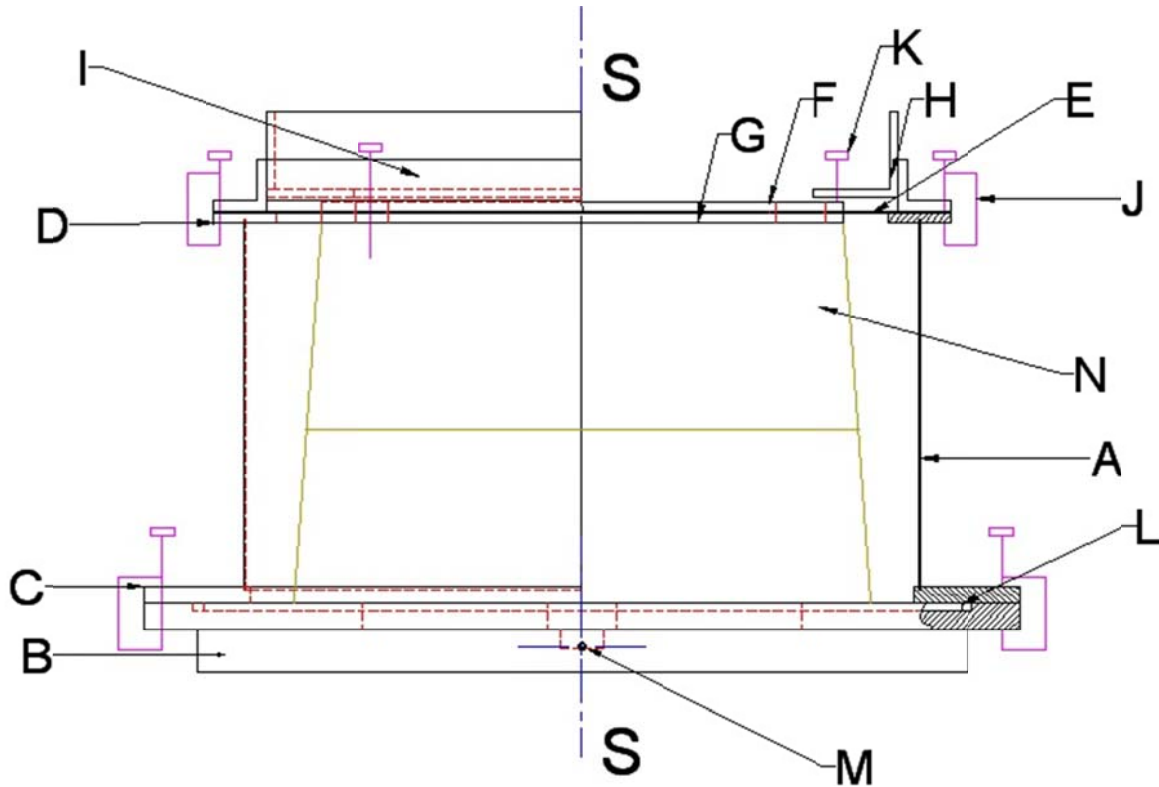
Detailed schematic of the device used to partially encapsulate sand molds.
